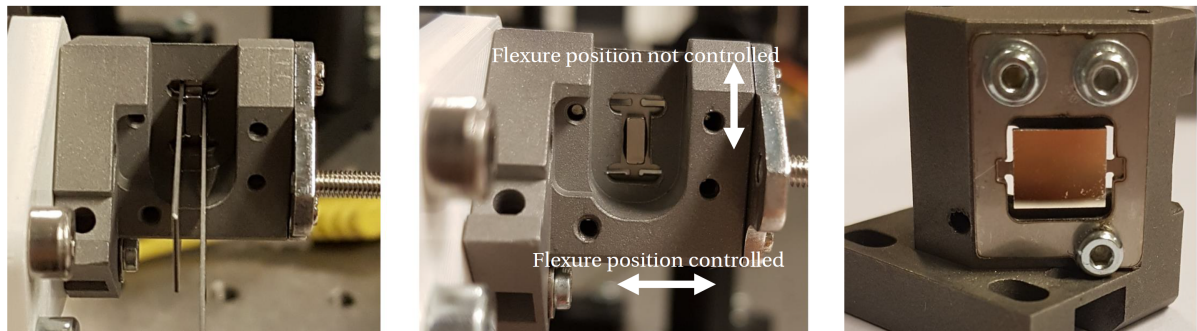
Left: Magnet centred with feeler gauges. Center: Flexure mounted in housing. Right: Front view of scanner
